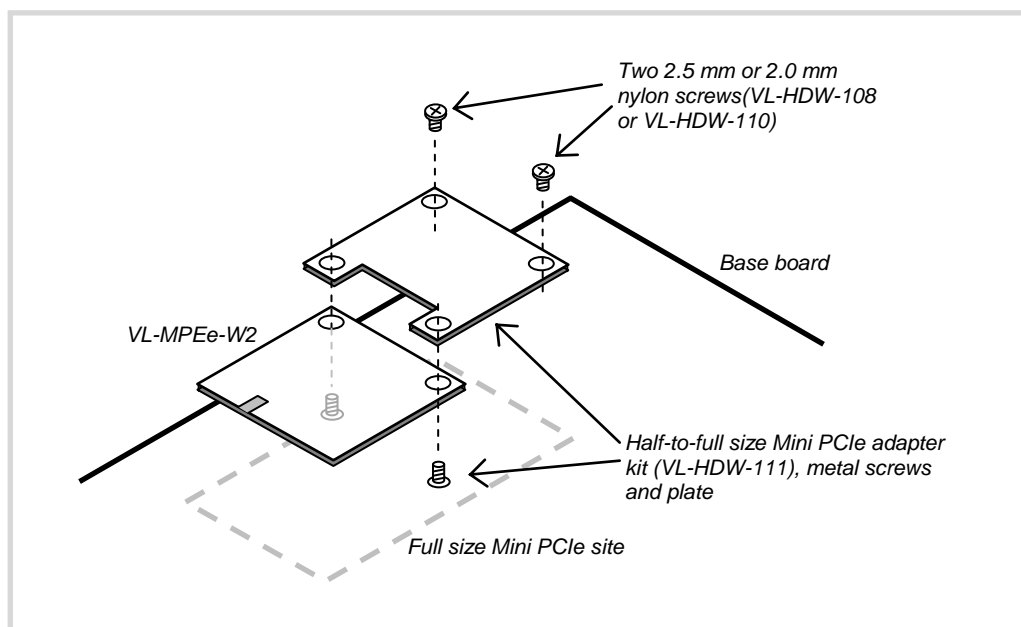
Mounting the VL-MPEE-W2 in a Full Size Mini PCIe Site
